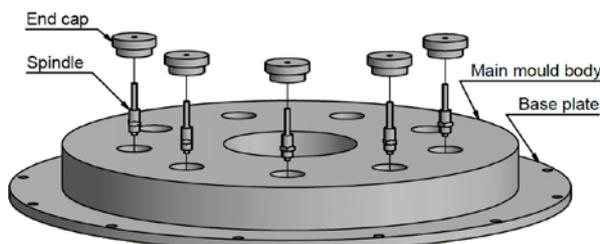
Mould assembly for the manufacturing of custom mounted point grinding wheels.
